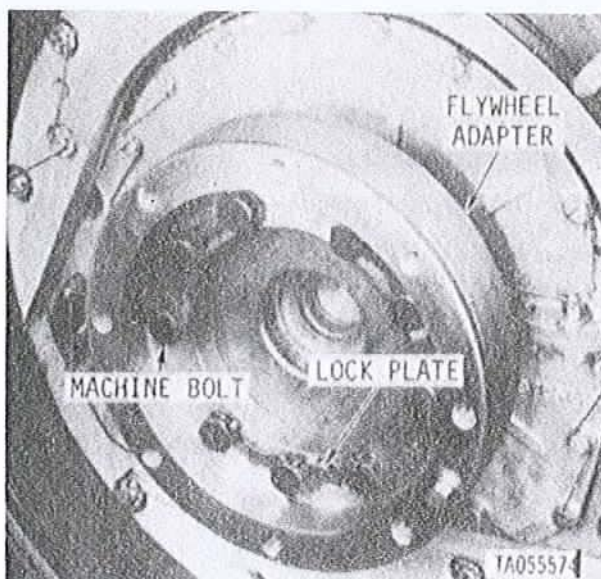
Removing flywheel adapter, model AVDS-1790-2DR engine.
